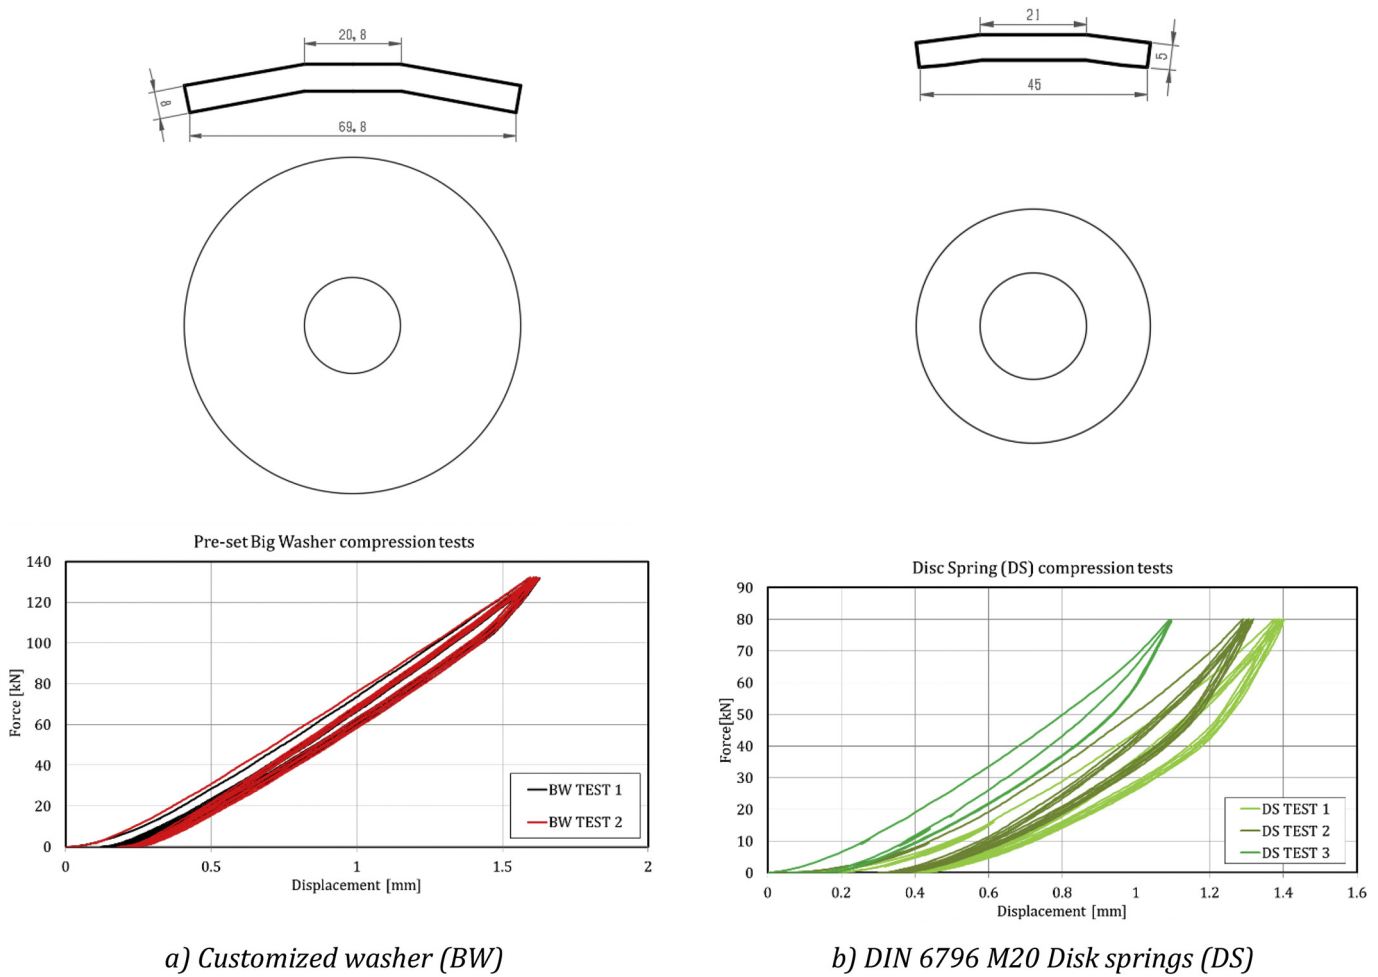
Tested configurations and labelling: a) BW- Big Washer (dimension in mm); b) DIN 6796 Disk Springs (DS)-(dimensions in mm).
